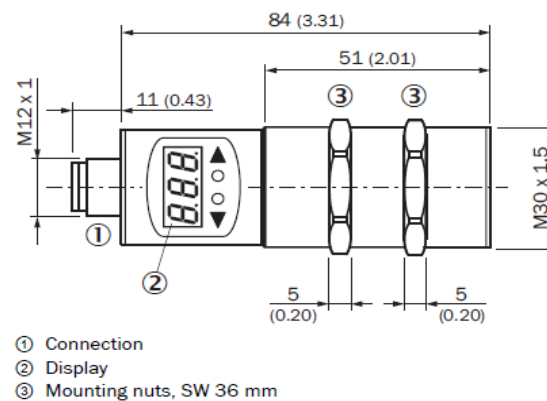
Um30-212118 Dimensional drawing. Extracted from [90]
